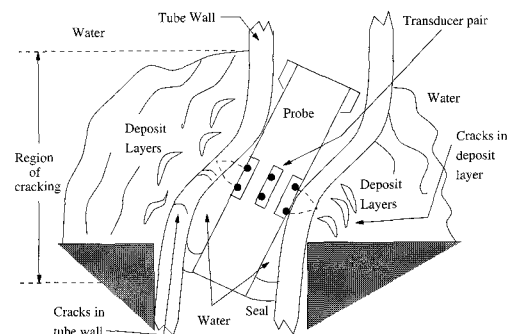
Geometry of ultrasonic NDE of the steam generator tube
